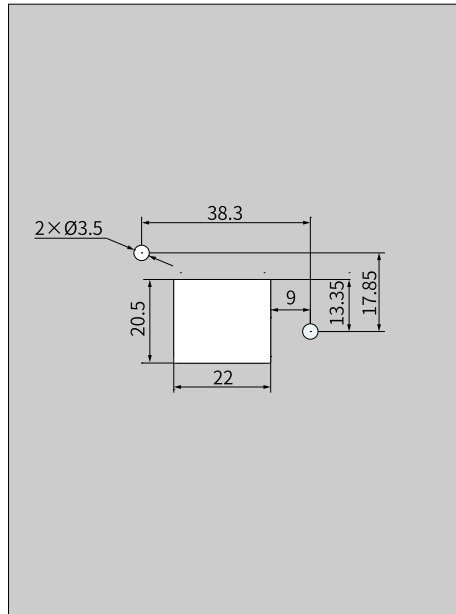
Dimensions (unit: mm) of the cabinet door opening for mounting the MD-BP-M with screws
